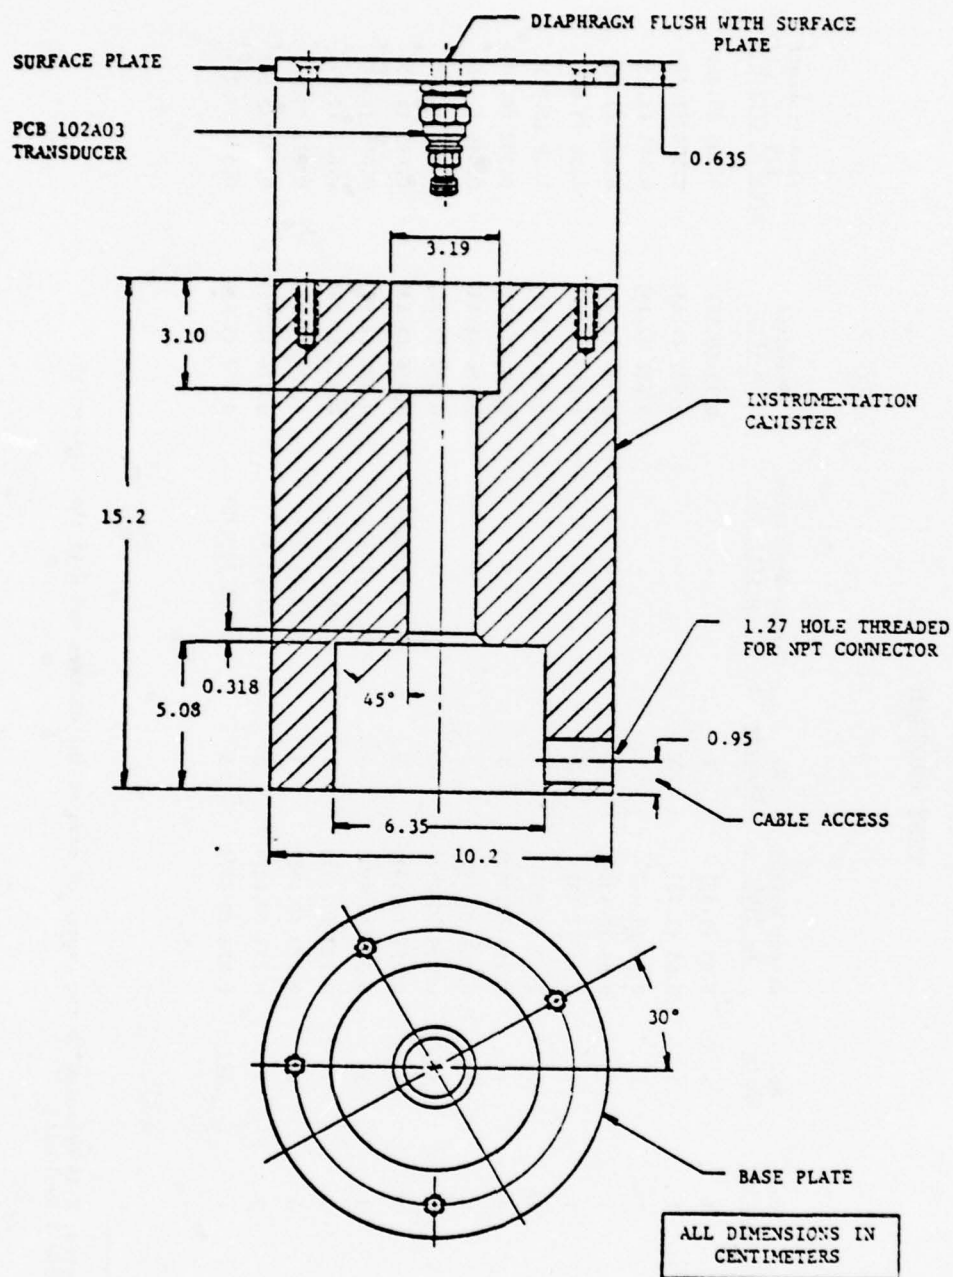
EXPLODED DIAGRAM OF THE PRESSURE MEASUREMENT ASSEMBLY
